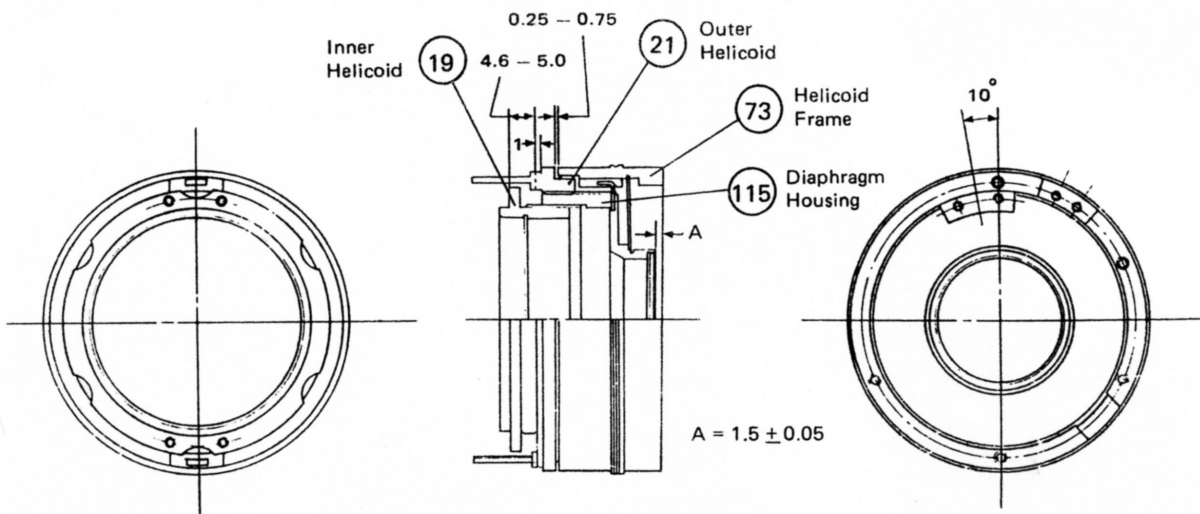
Helicoid Assembly Critical Dimensions, Canon Mount
